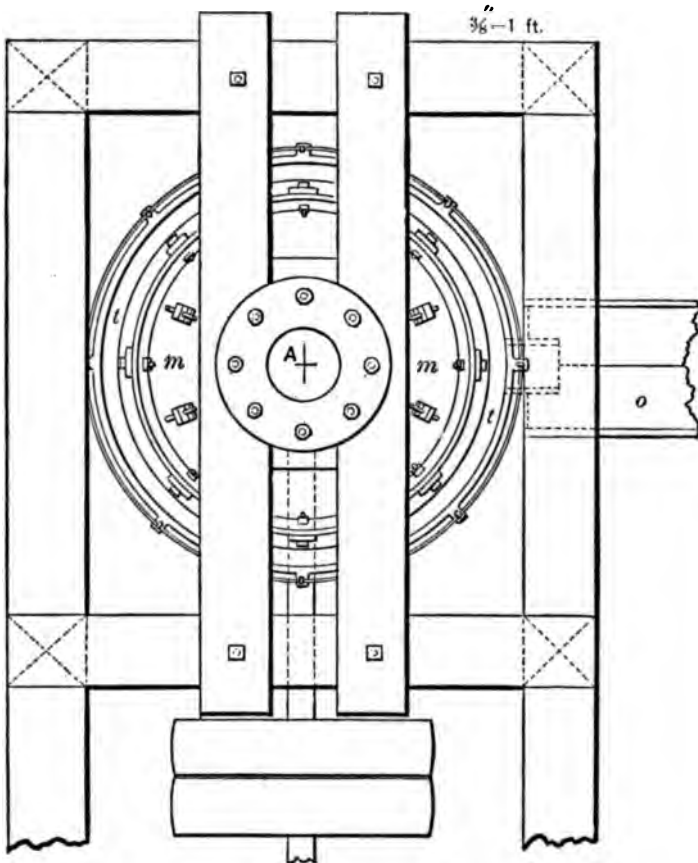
LUMP-GRINDING MACHINE, PLAN.
